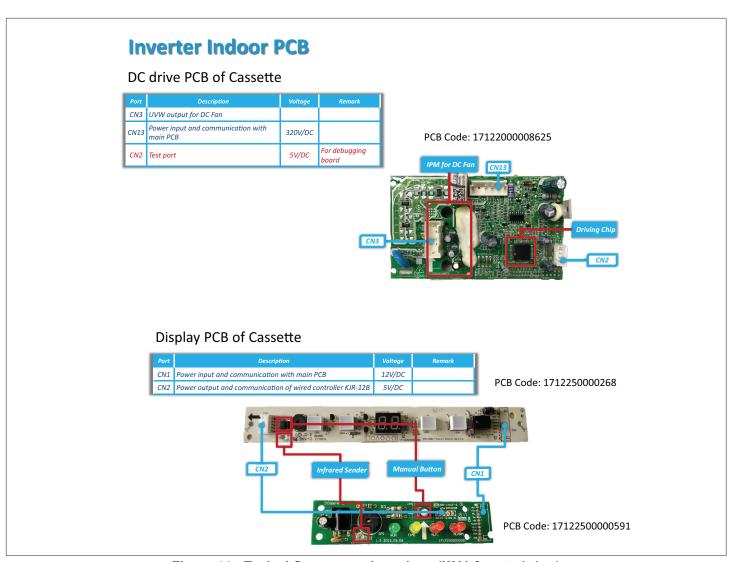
Typical Component Locations (M22A Cassette Indoor)
